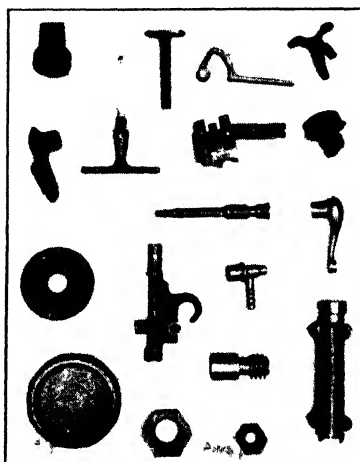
Power-press forgings, both American and European, held to tolerances between ± 0.005 and ± 0.010 in.
